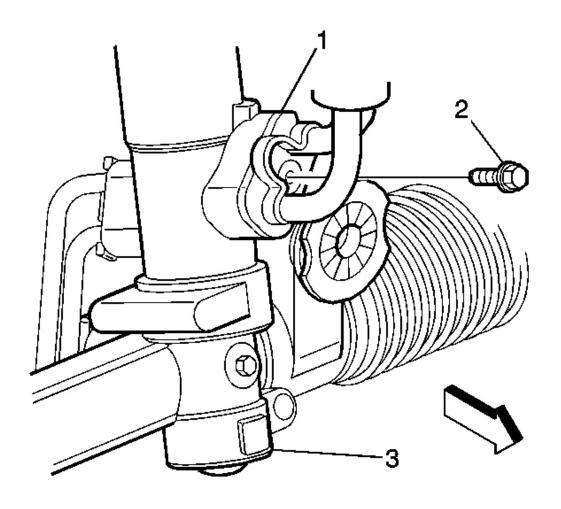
Disconnecting/Reconnecting Power Steering Hose Assembly To Power Steering Gear
